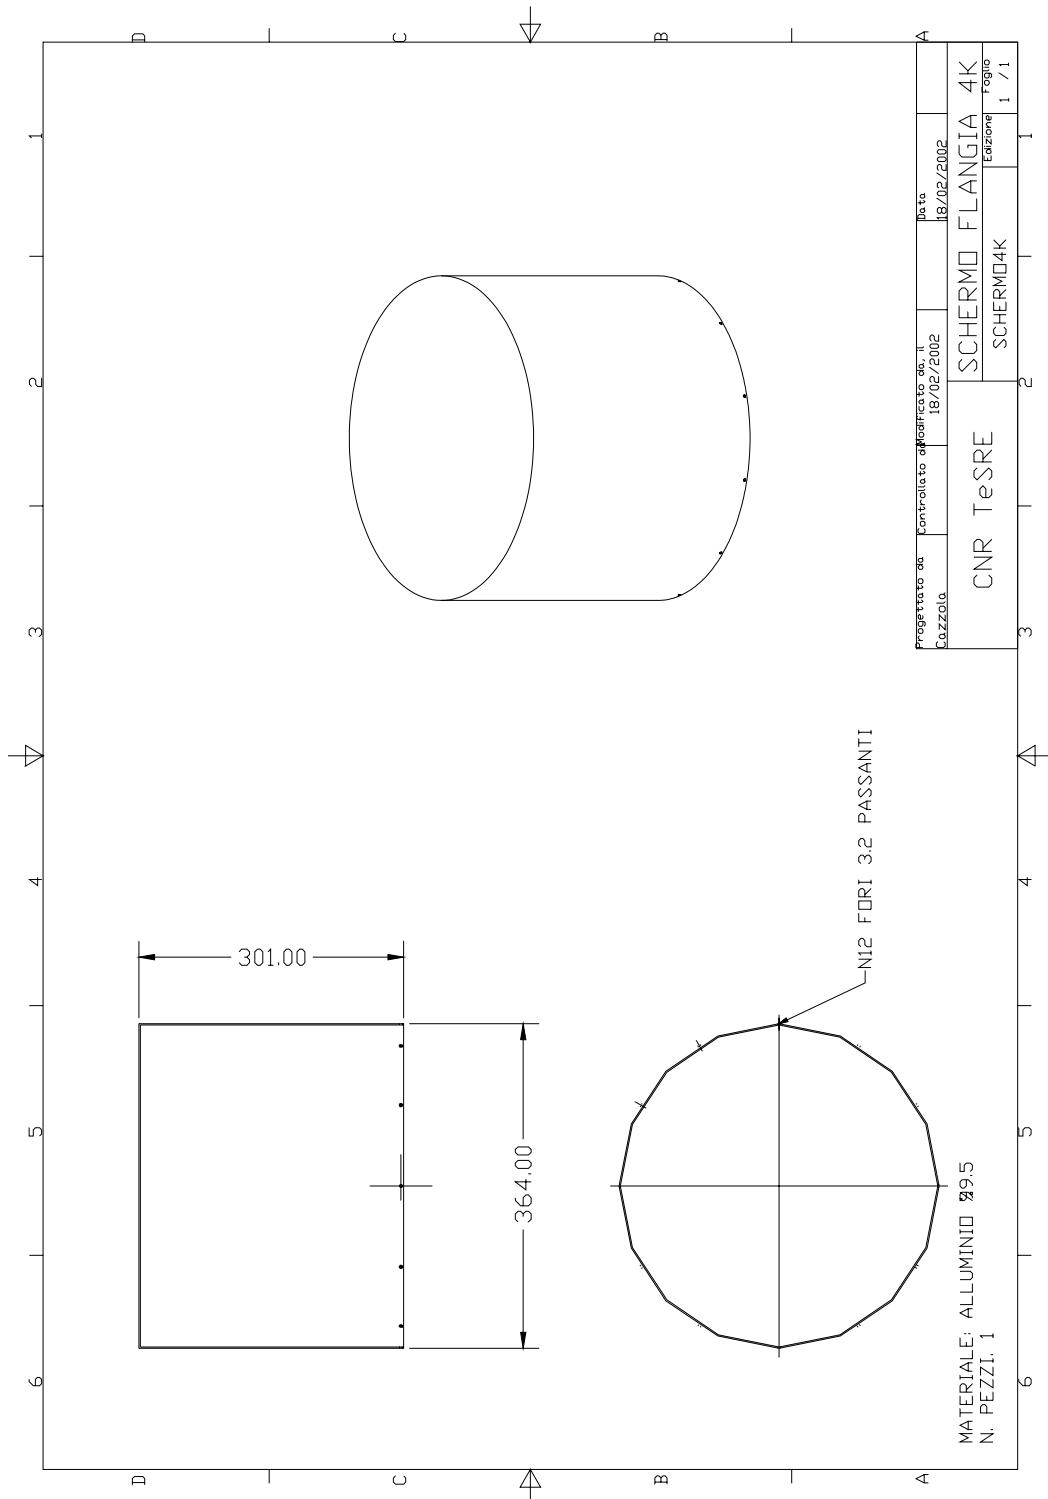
Drawing of the 4K radiation shield, made of aluminum 99.5%
